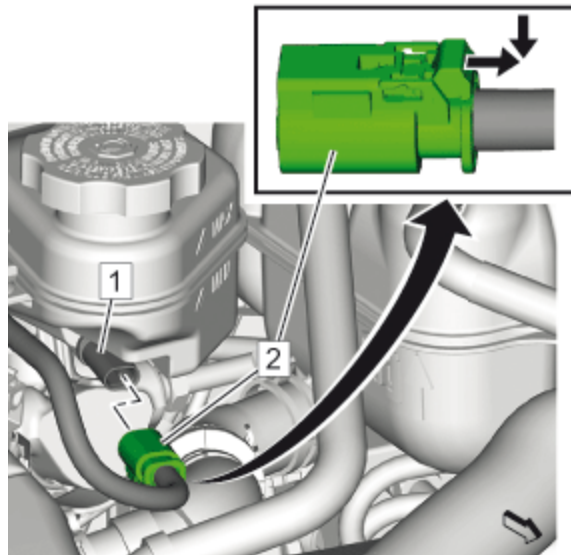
Electrical Connector And Brake Fluid Level Sensor
